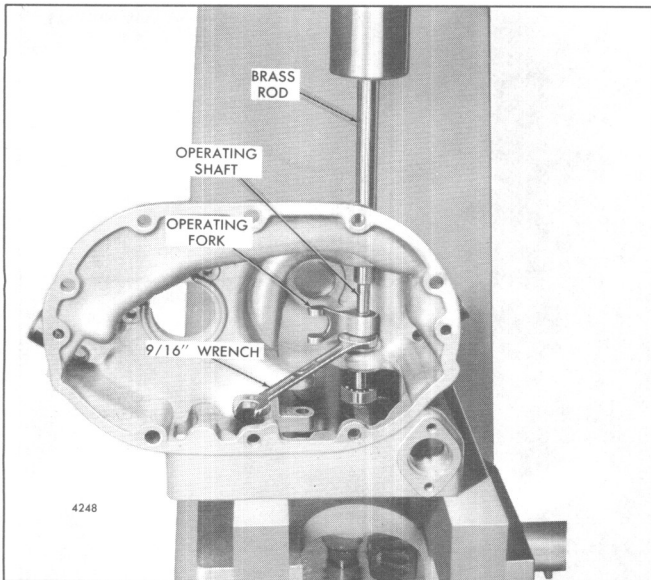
Removing Operating Fork, Operating Shaft and Lever Assembly from Governor Housing
